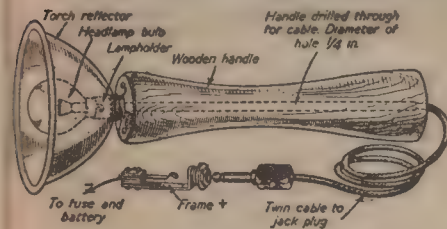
Showing method of constructing the inspection lamp, also the jack and plug before fixing to the fascia panel.
